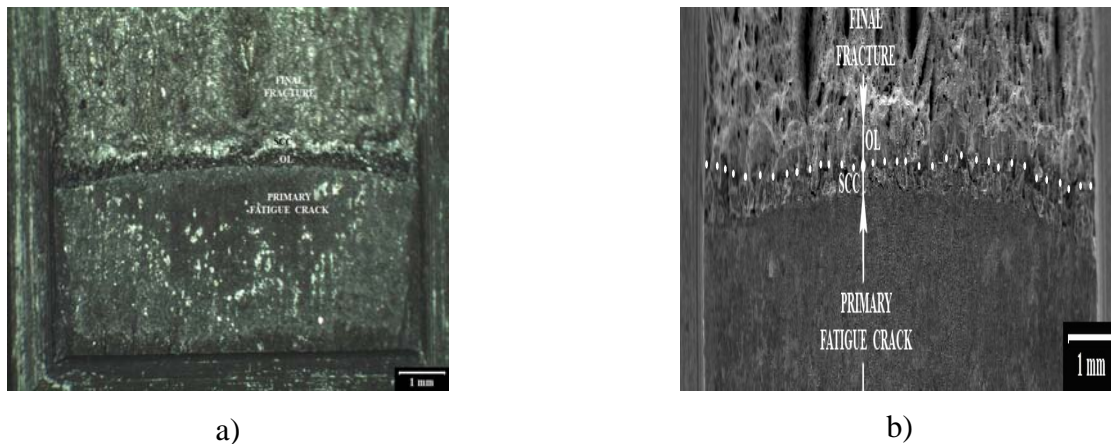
Fracture surface of AC23 specimen exposed to very slow rising load test executed under SCW (550°C, 250 bar and 8000 ppb of dosed oxygen) a) before b) after using the cleaning method developed at CTU FNSPE Department of Materials in Prague [10].
